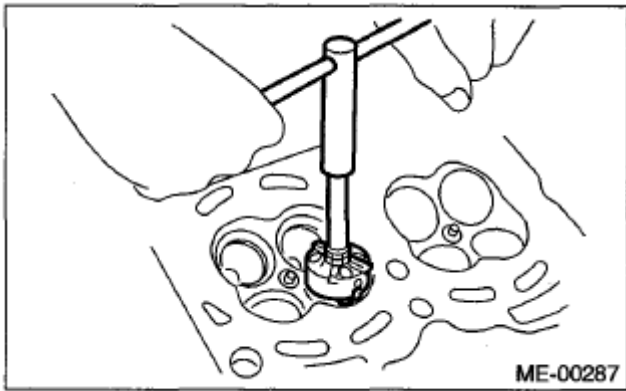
Cutting Valve Seat Using Valve Seat Cutter
